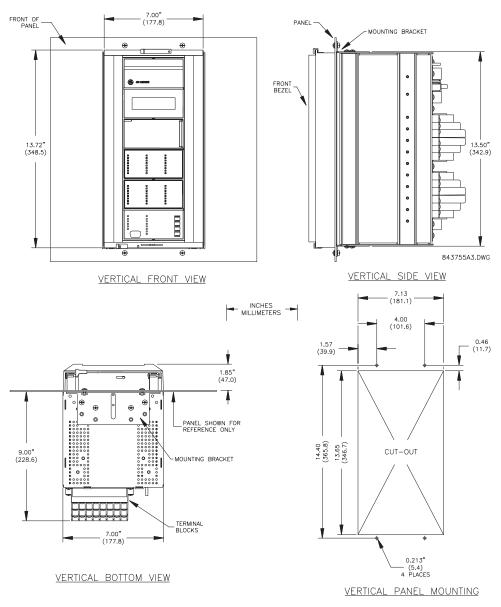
UR VERTICAL MOUNTING AND DIMENSIONS
